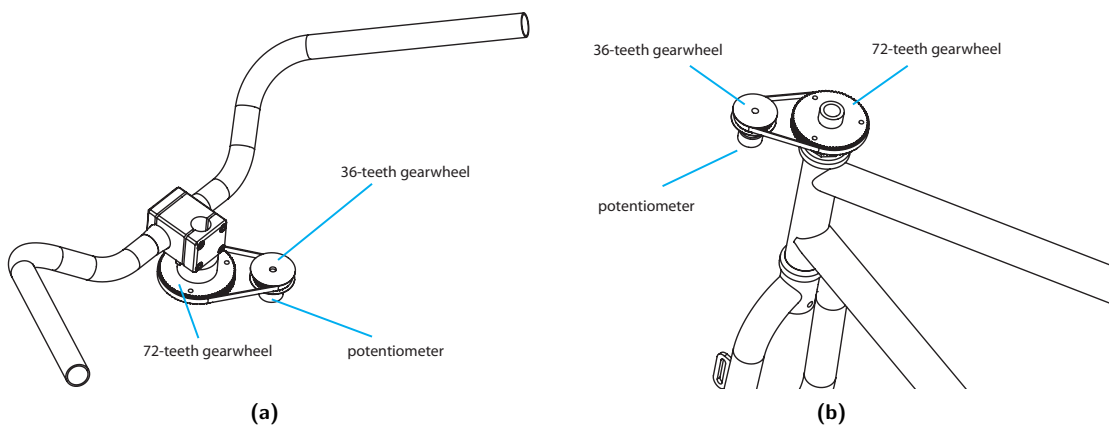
The decoupled handlebar assembly (a) and steering assembly (b) on the bicycle showing the potentiometer driven by a timing belt construction.
